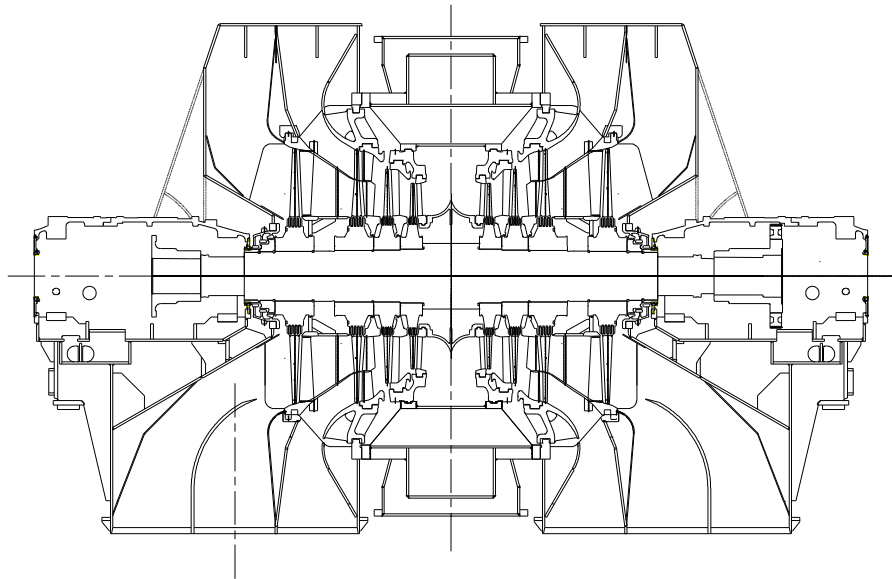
A: DETAILS OF EXISTING DESIGN FLOWPATH
